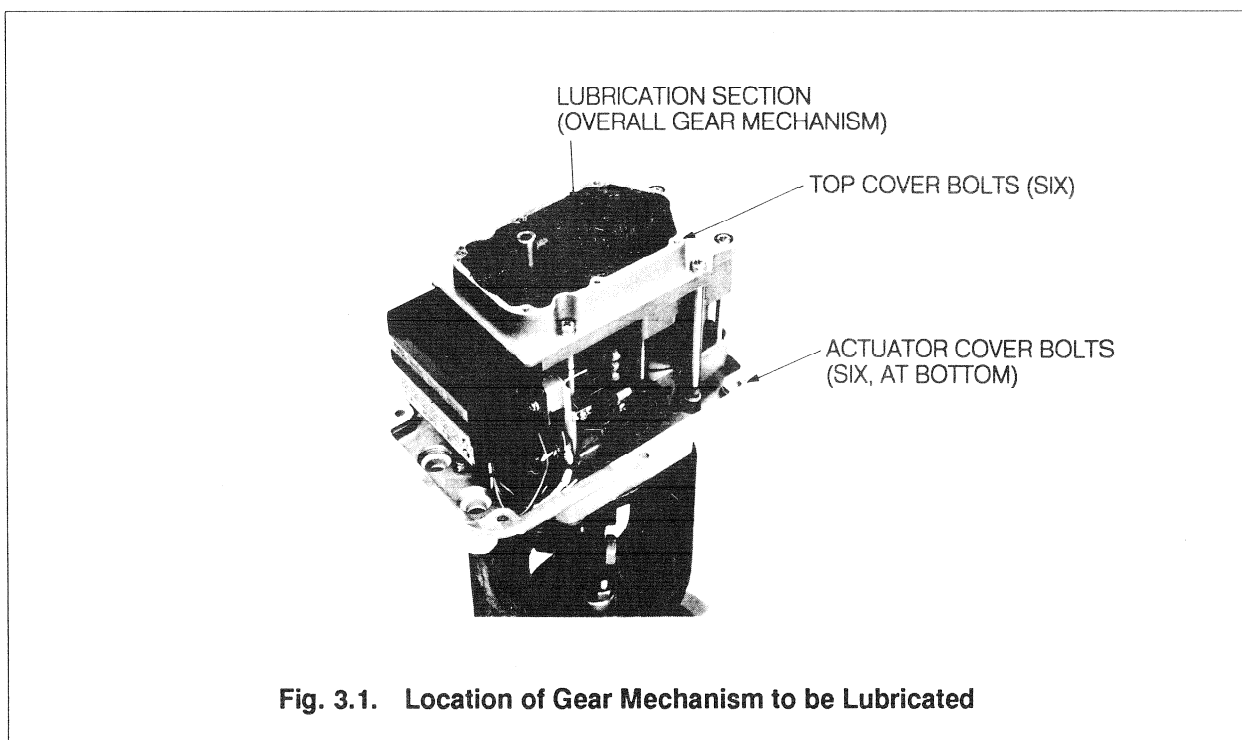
Location of Gear Mechanism to be Lubricated
